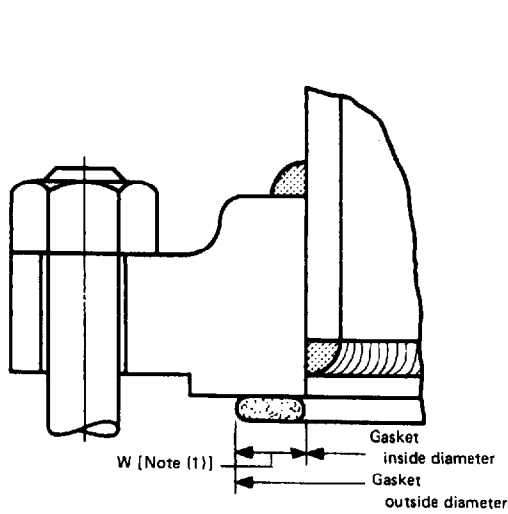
³ LARGE TONGUE WIDTH GASKET WITH GASKET I.D. EQUAL TO PIPE I.D.
